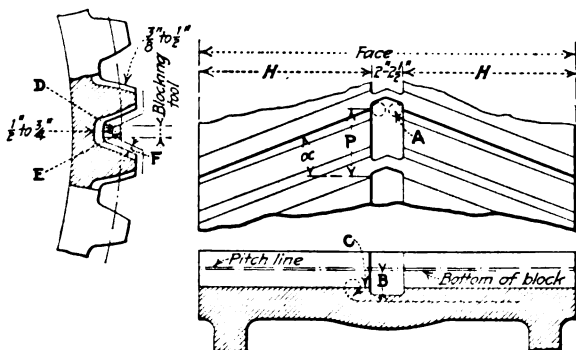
DIAGRAM TO SHOW CLEARANCE POCKET IN PLANED GEAR
